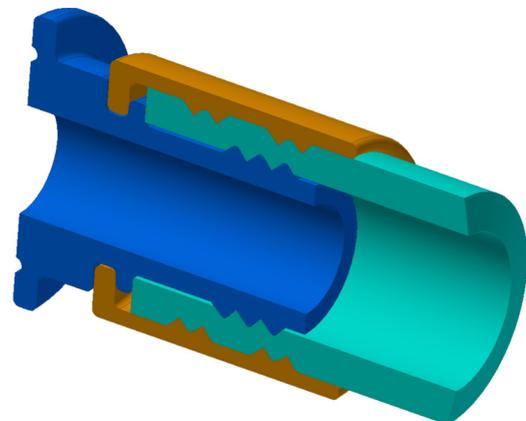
Outer sleeve of a hose fitting deforming a hydraulic hose so barbs engage, seal, and hold hose in place.
